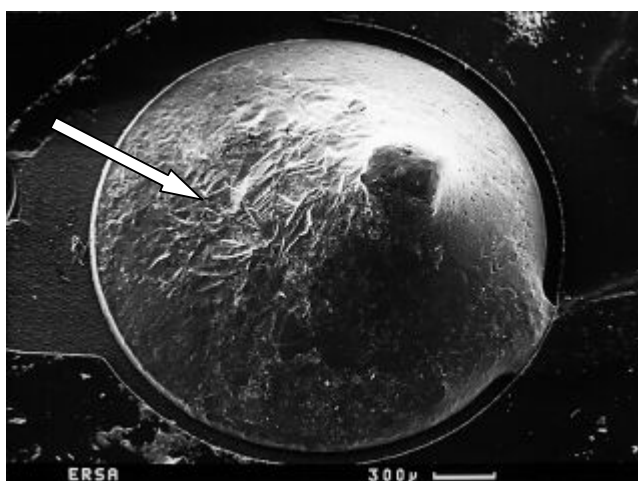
Needles of Cu_6Sn_5 in a soldered joint
